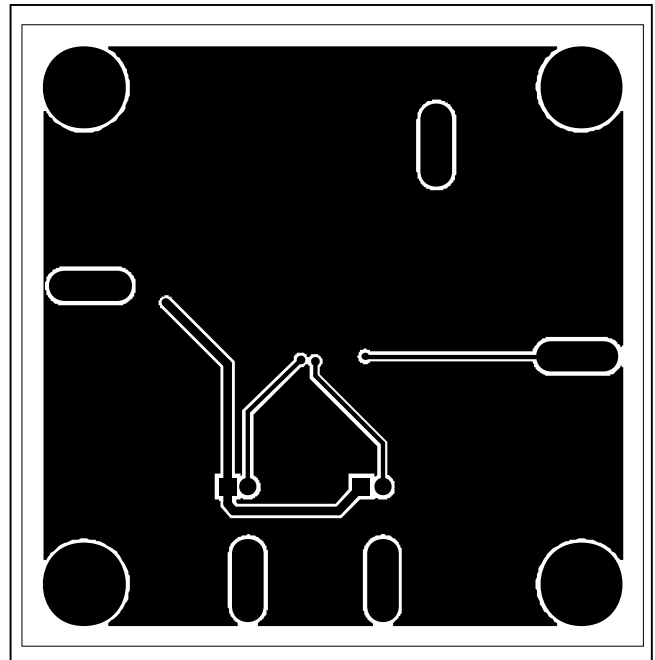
MAXM17543 EV Kit PCB Layout—Solder Side
